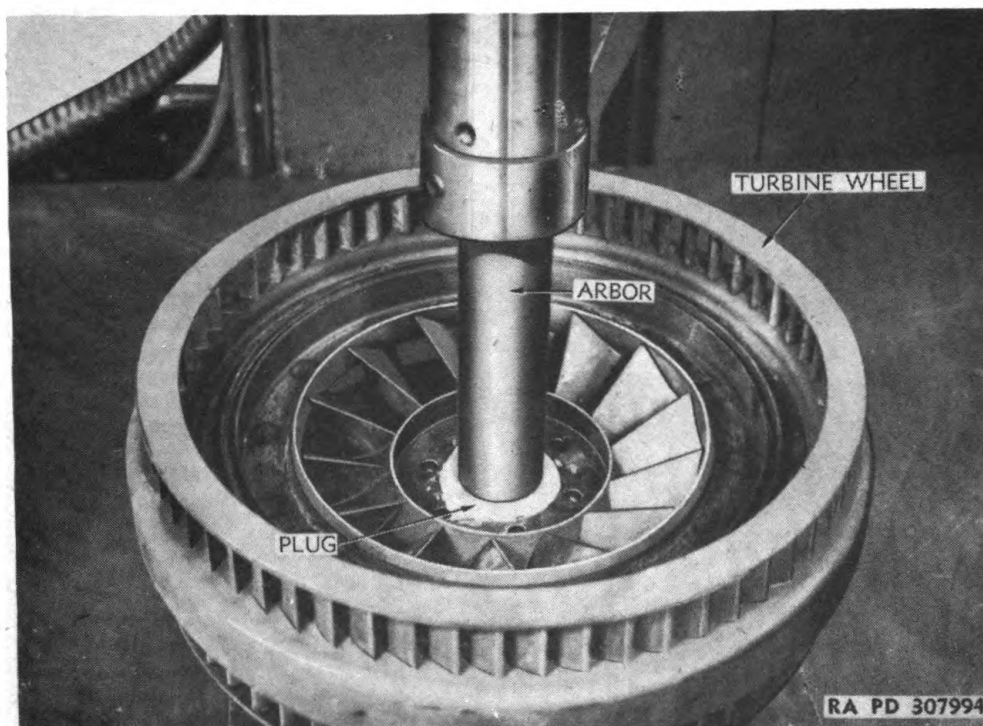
Pressing Cup Plug Into Turbine Wheel
